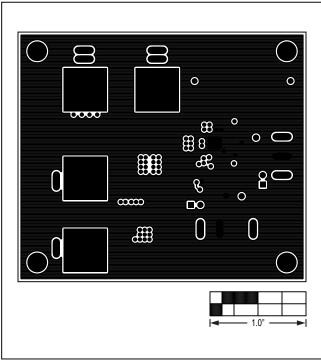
MAX16962R EV Kit PCB Layout—PGND Layer 2
